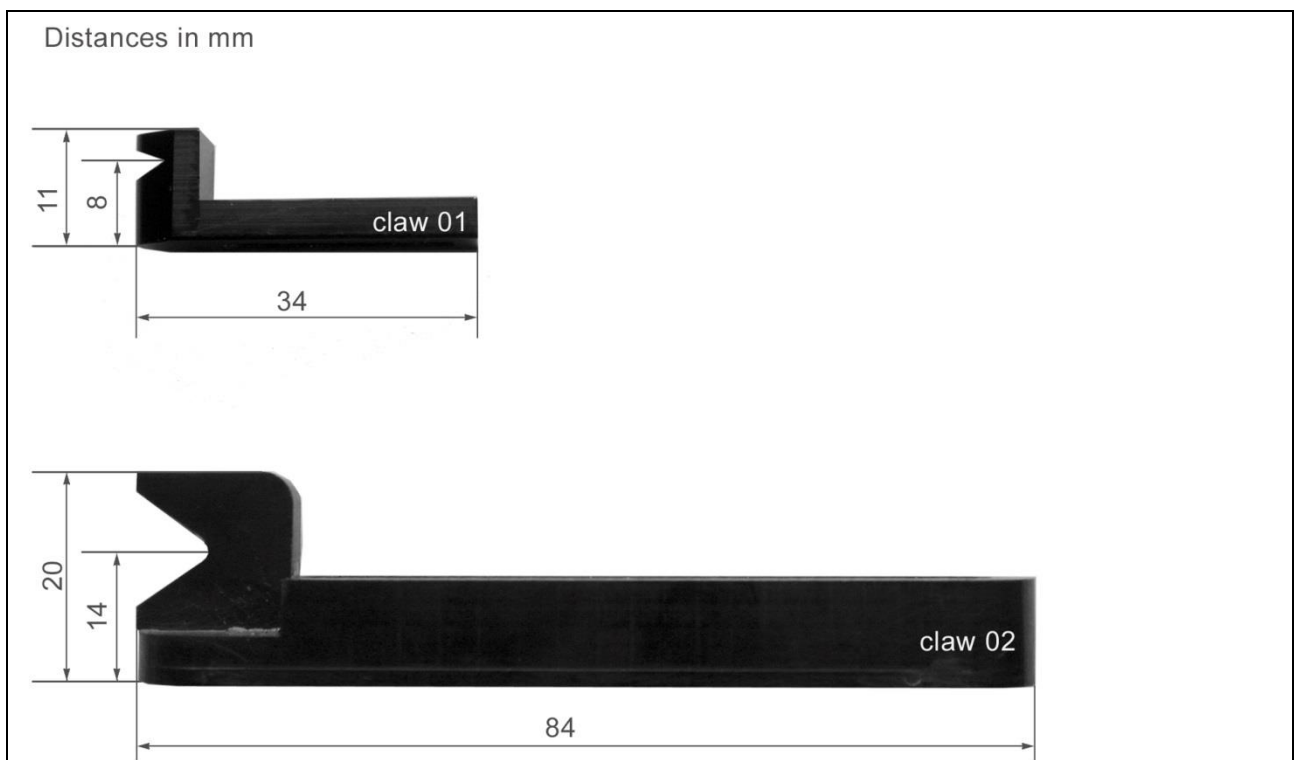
Dimensions of the claws for the UH DUT (claw 01 and claw 02)
